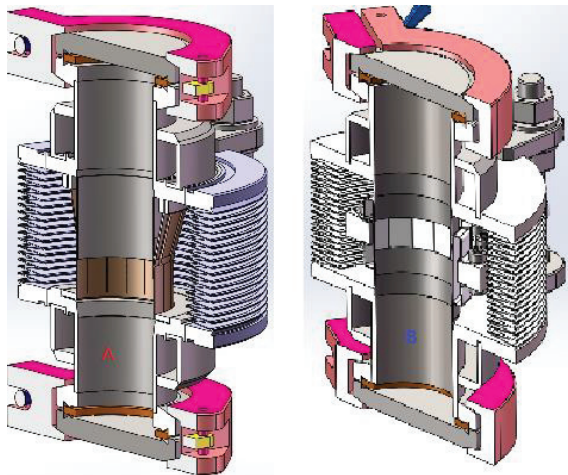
Two configurations of RF shielded bellows (A-outside finger; B-omega stripe).
